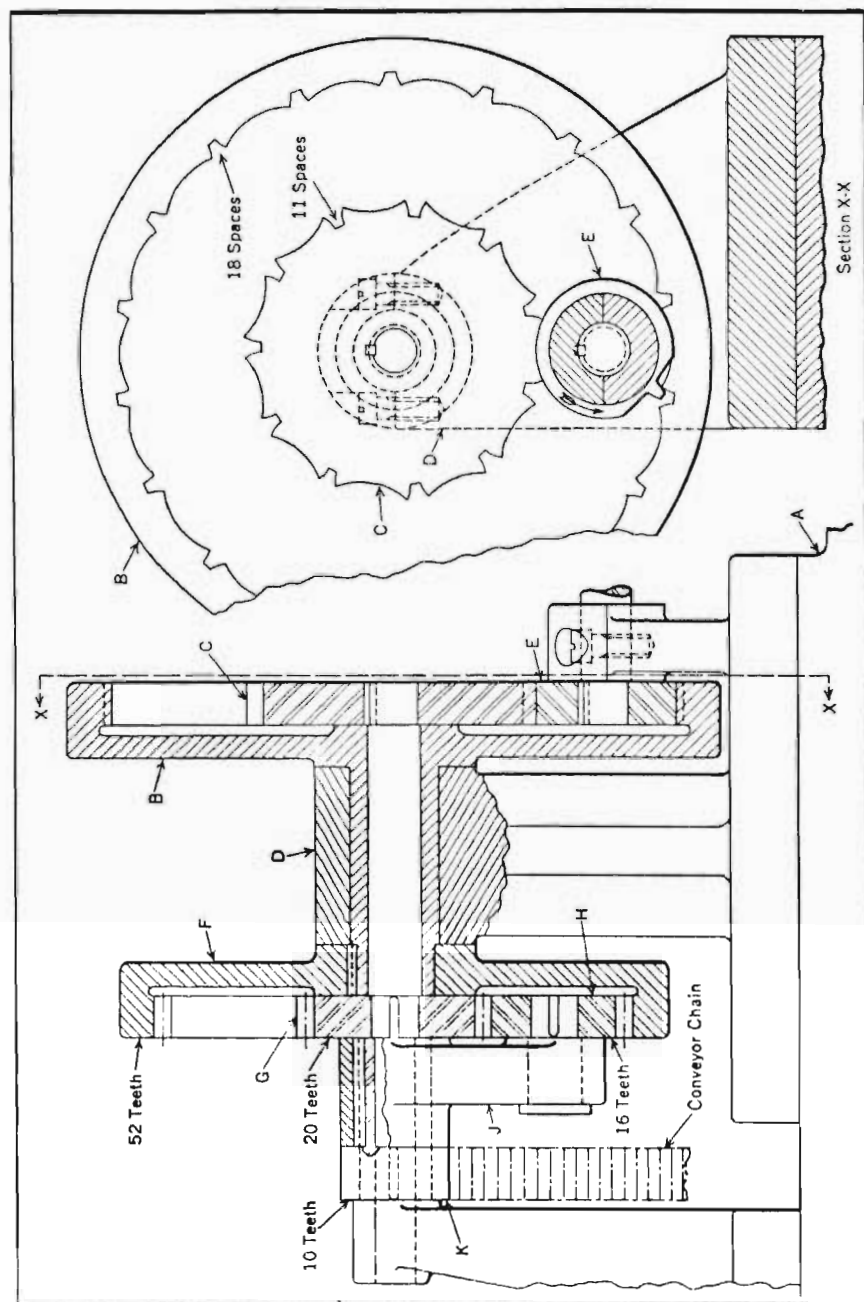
Mechanism for Imparting Advancing Reciprocating Motion to Conveyor Chain of Enamel Dipping and Baking Machine
